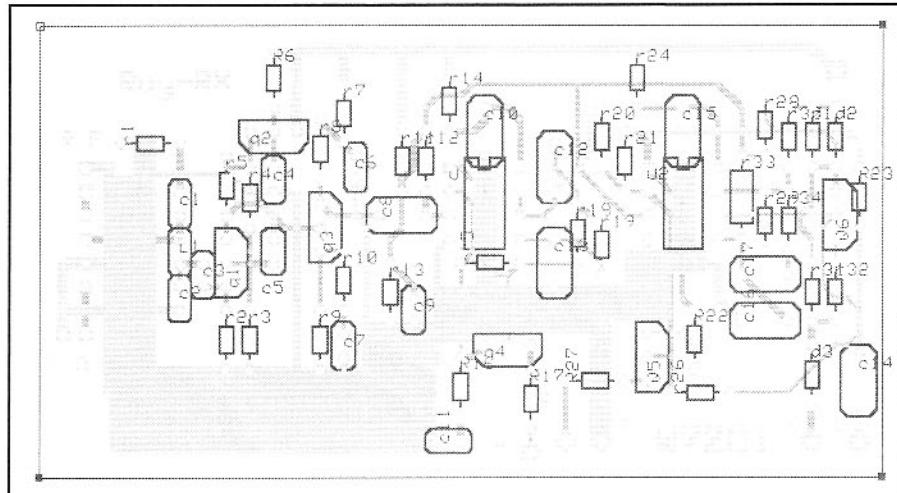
View of the component side of the circuit board. Copper runs on both sides of the circuit board are shown. The board layout is double sided, through-hole plated, and was done with the program *Express PCB Version 2.1.1* found at www.expresspcb.com.
